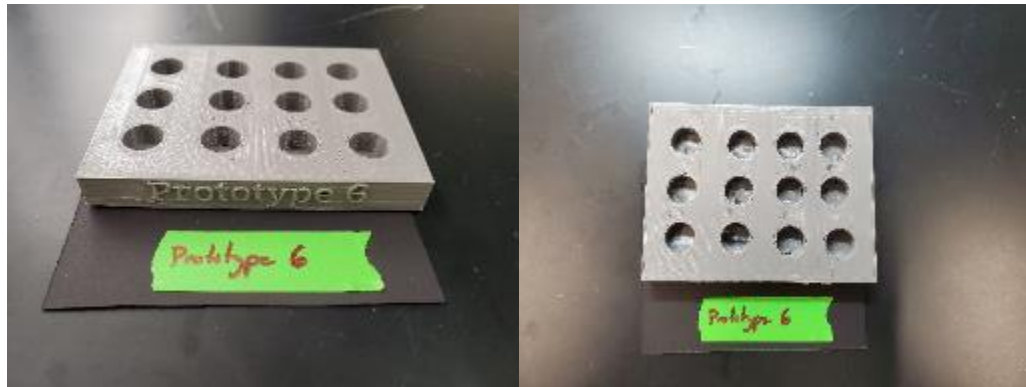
Prototype 6 3D Mold, Angled View (Left), Top View (Right)
